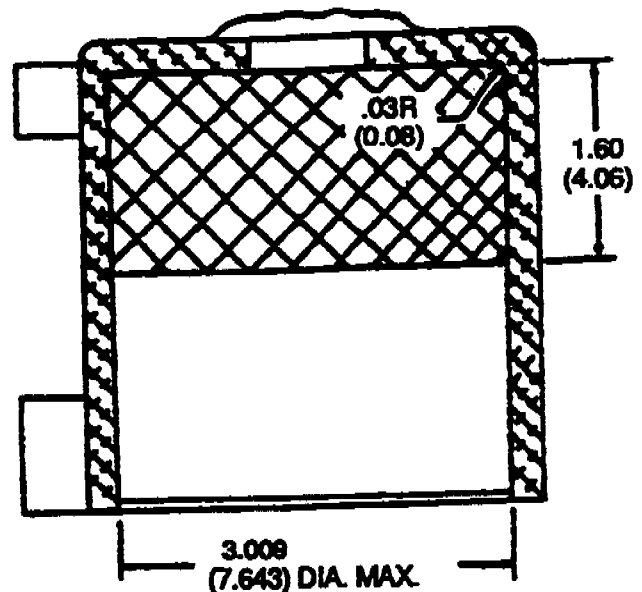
Interstage Bleed Actuator Assembly Dimensional Inspection Locations.
